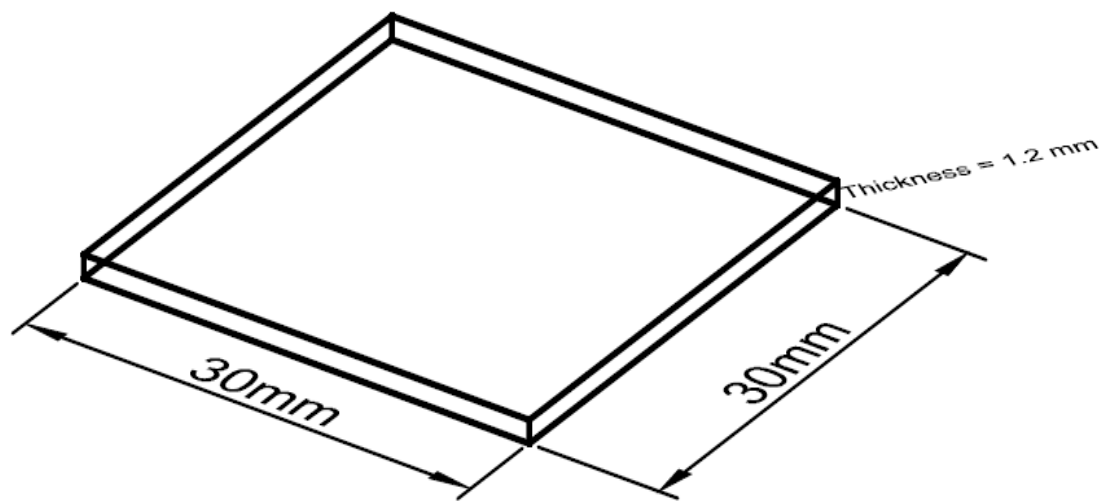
(b) illustrate the drawing of test specimen and its dimension
